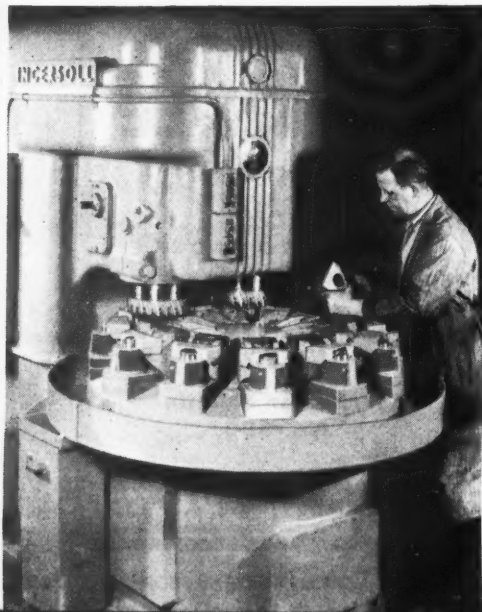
Illustration Showing Ingersoll 2-Spindle Rotary Table Milling Machine.
